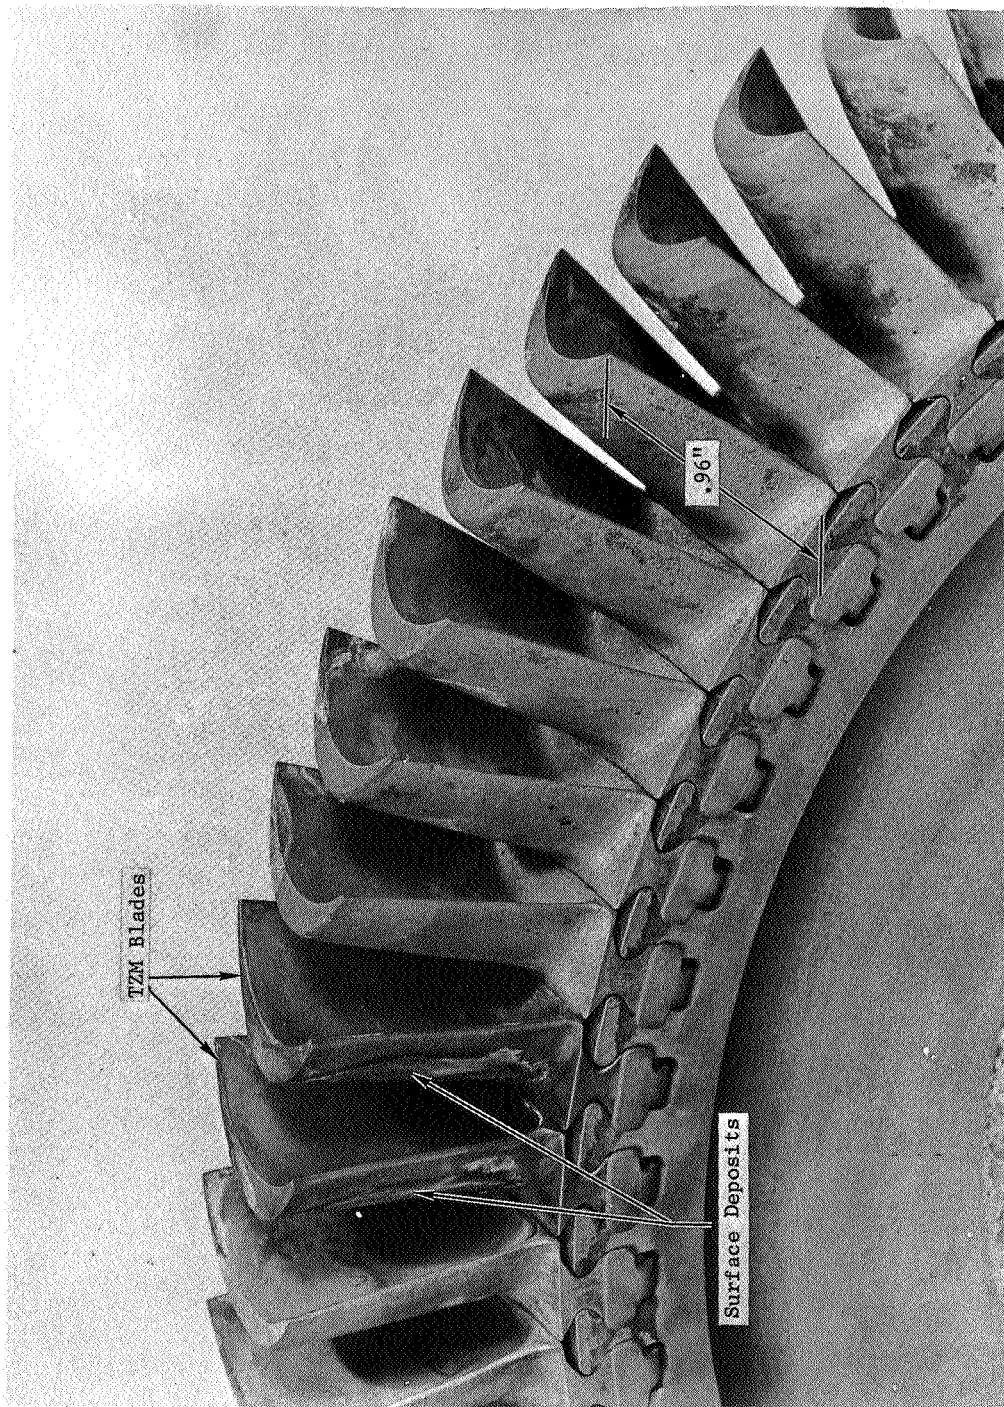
Second Stage Turbine Wheel Assembly After 2000 Hour Endurance Test. (C65123016)
